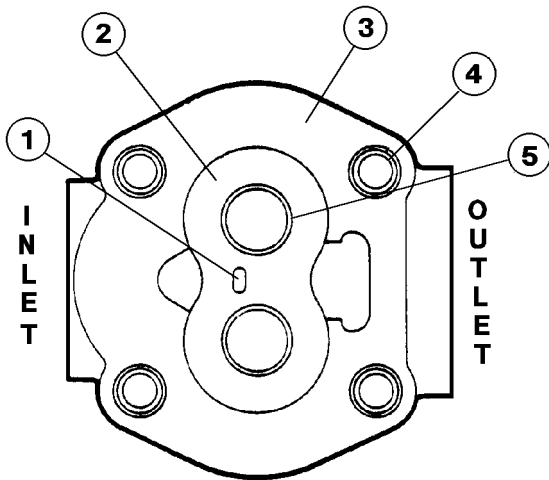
PRESSURE PLATE INSTALLATION
